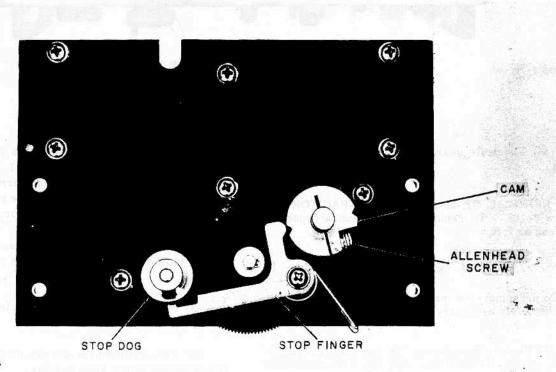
Tuning Drive Subassembly, Cam and Stop Dog Alignment
